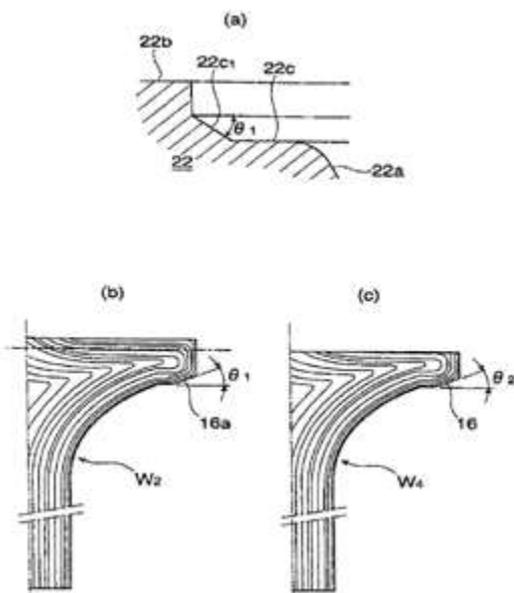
Grain flow lines formed in a valve head in the secondary forging.
